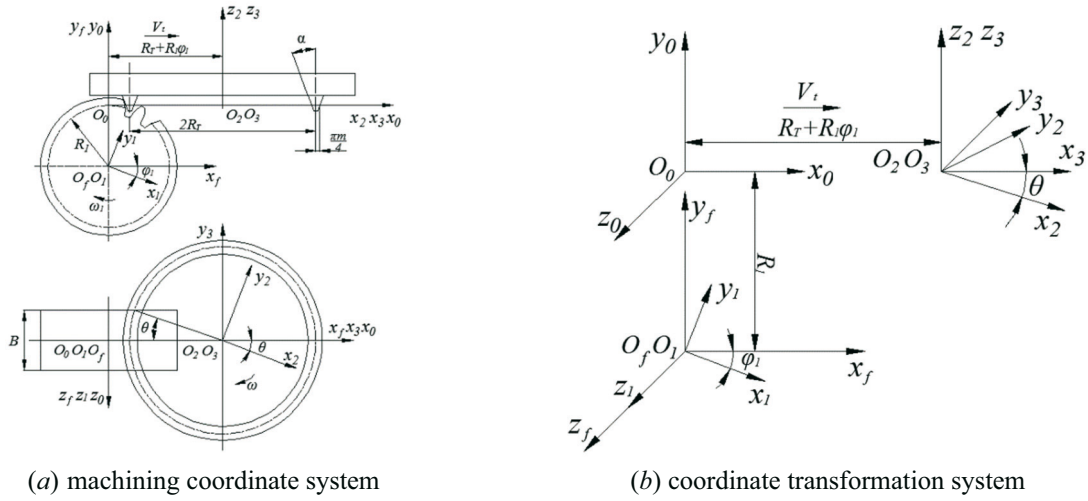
Reference coordinate system of ideal VH-CATT cylindrical gear
